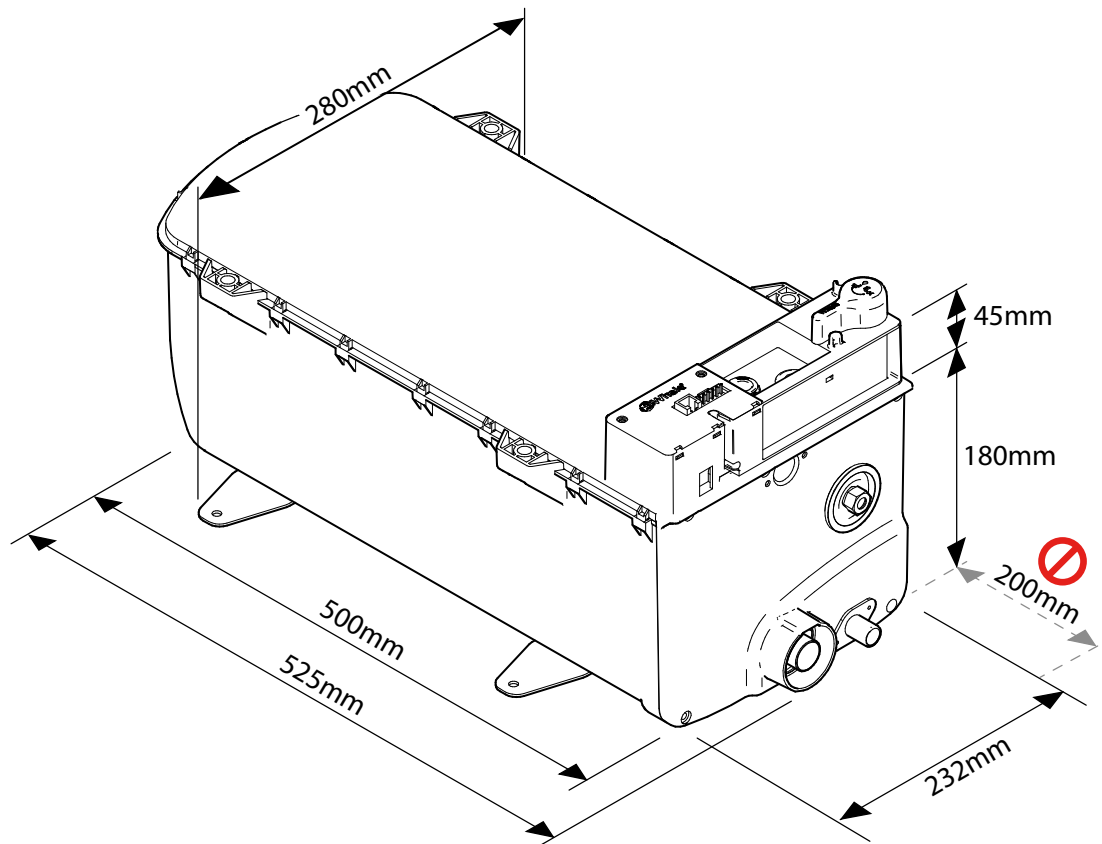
Heater Dimensions / Abbildung 2. Abmessungen der Heizung
